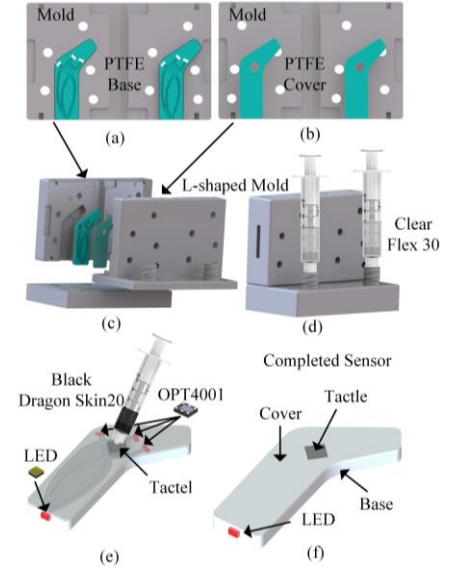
Fabrication process of the optical-based sensor. (a) CNC molds of PTFE base. (b) CNC molds of PTFE cover. (c) Sealing with L-shaped fixed mold. (d) Injecting core material. (e) Injecting Dragon Skin 20 to form the tactel and assembling with the LED and light detectors. (f) The proposed sensor is completed when the tactel cured.
